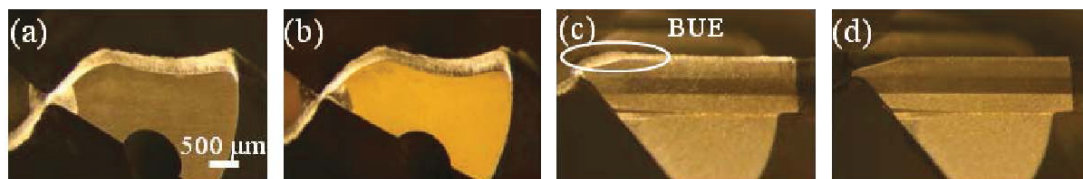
Tool wear scar at test cessation (a) Test 2, (b) Test 4, (c) Test 5 and (d) Test 5 following removal of BUE
